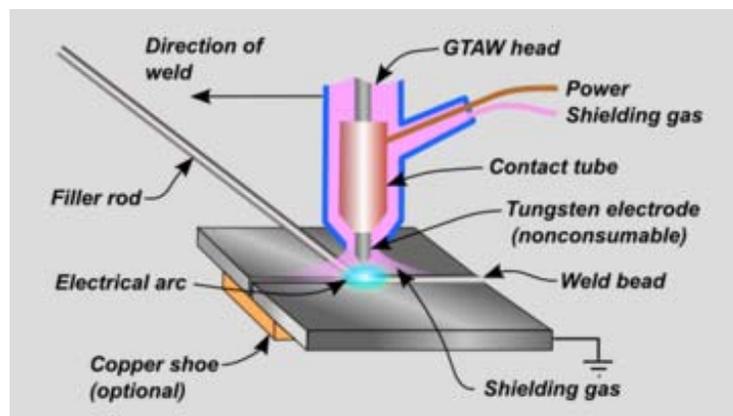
, General GTAW weld area [48] (no filler rod used in our system)
